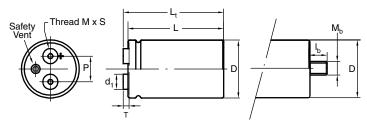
B: High current M6-18 mm disc and 1/4-28 UNF disc: Screw Terminal (ST) and Screw Terminal Bolt nut (STB)
